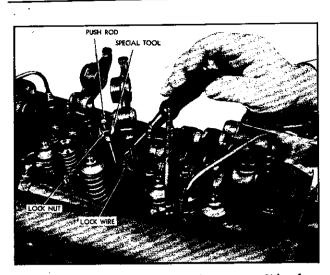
Removing Push Rod from Upper Side of Cylinder Head.
